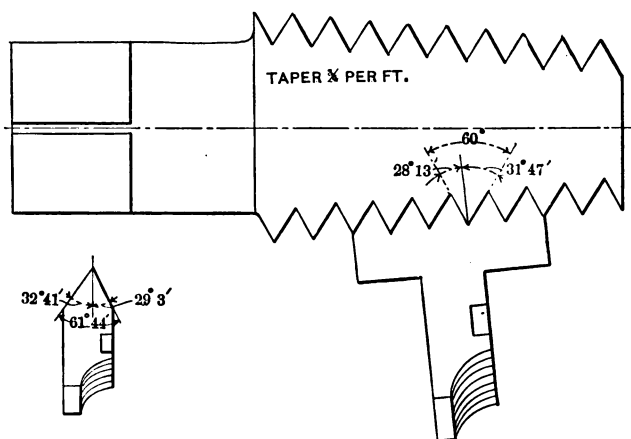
Taper Tap cut with Chaser made According to the Method shown in Fig. 58
